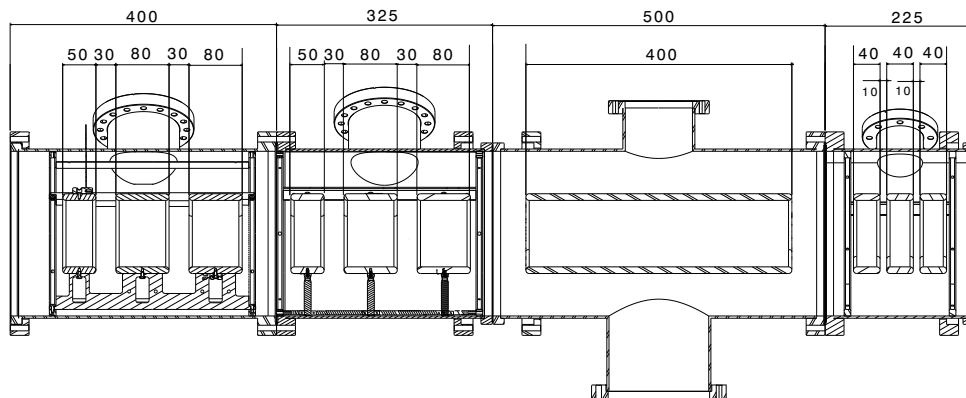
Computer-aided design drawing of the DN250CF vacuum chambers with electrode lengths indicated (all diameters are 100 mm).
